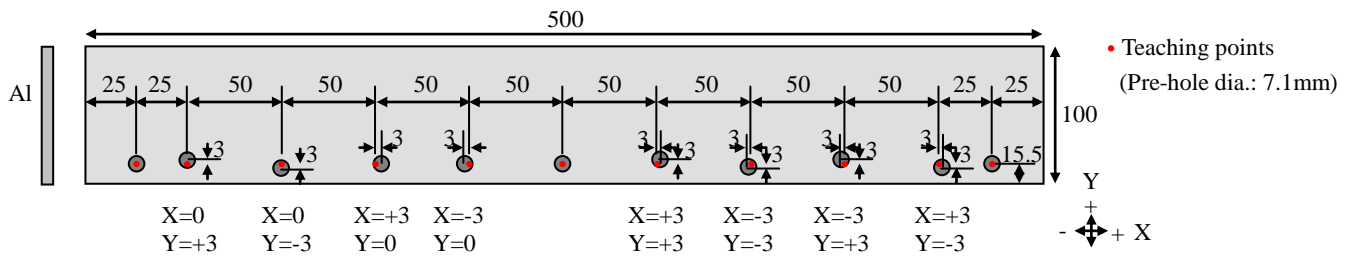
Test plate design drawing with pre-holes deviated from teaching points
